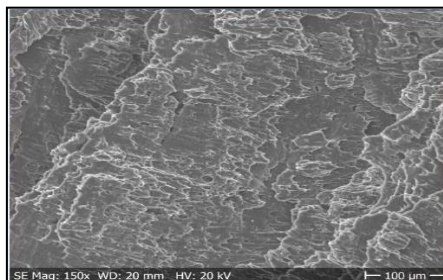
The ductile fracture surface of the rheocasting specimen.
